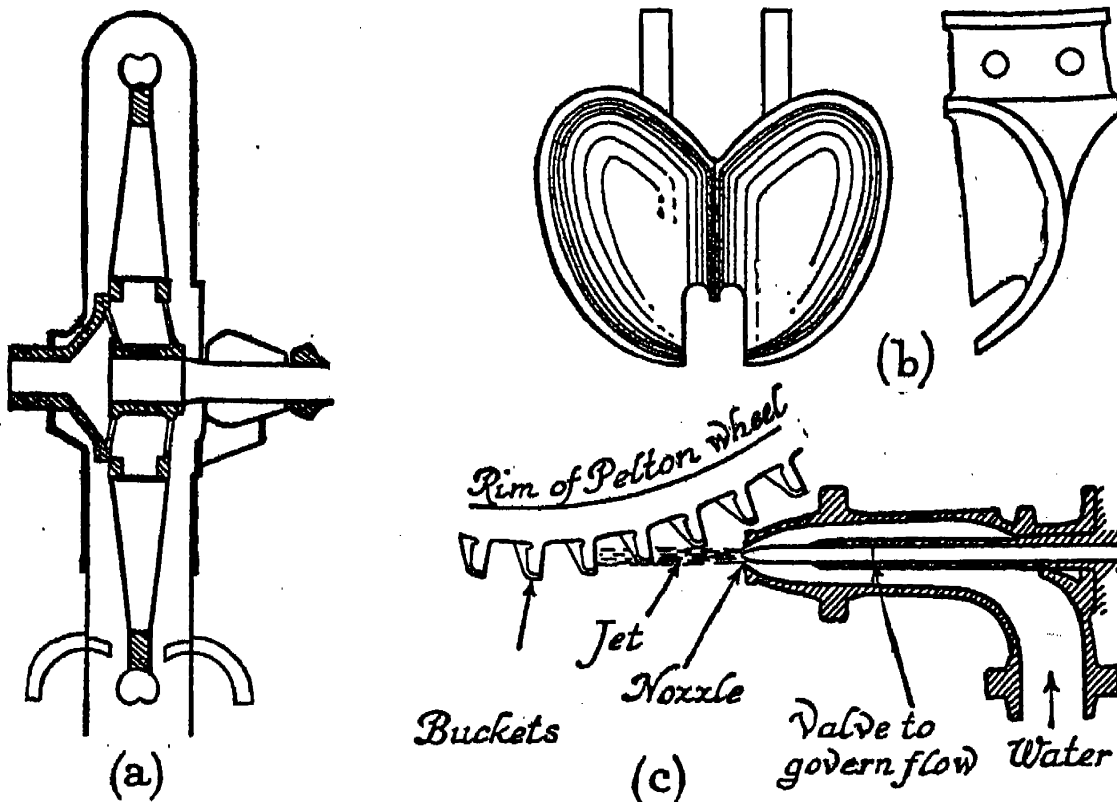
A Pelton wheel. (a) The wheel seen edgewise. (b) A 'bucket' with its notched edge. (c) The jet hitting the buckets on the rim of the wheel. (*Gibson's Hydraulics.*)
